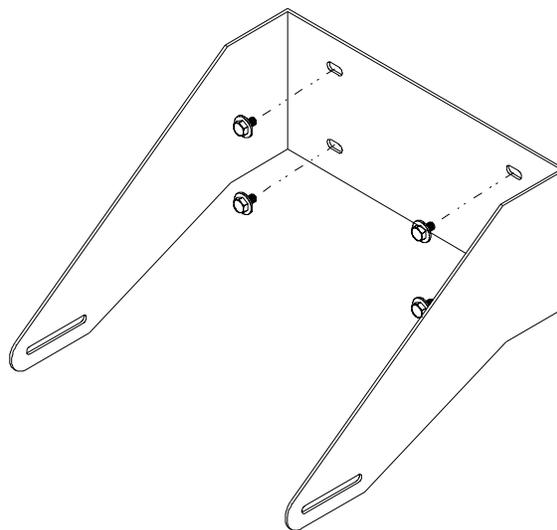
INSTALLING THE SWIVEL MOUNT TO A VERTICAL SURFACE
